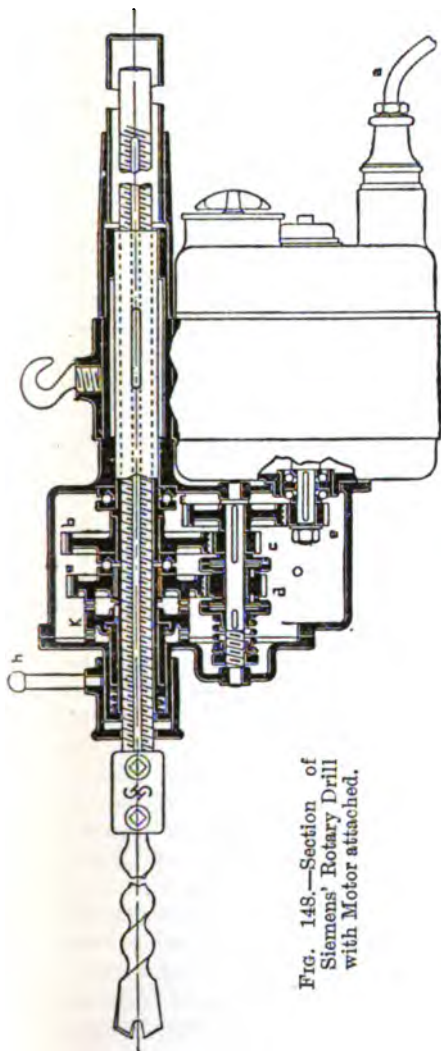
Section of Siemens' Rotary Drill with Motor attached.
